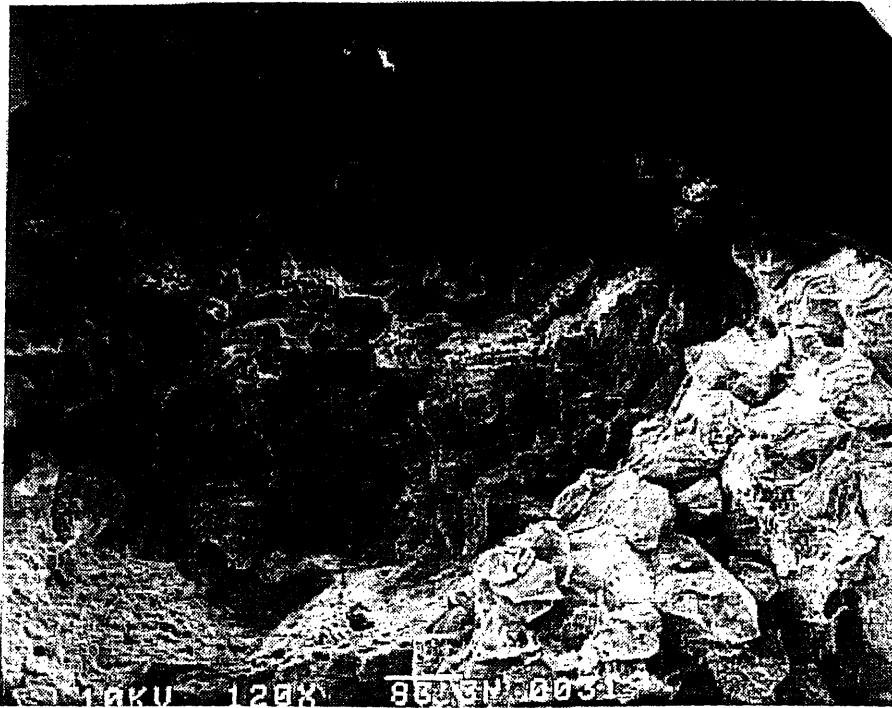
Magnified image of small ductile sites on the fracture surface of specimen 2003, furnace sensitized alloy 304.
